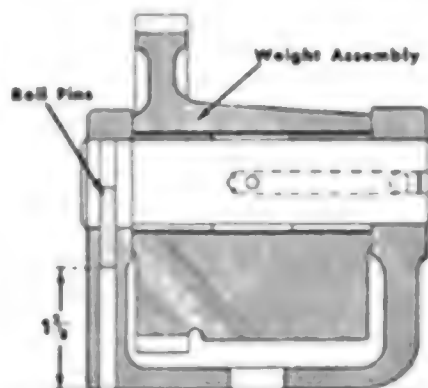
Sectional view of balancer weight gear, housing and shaft showing correct installation of roll pins. Roll pins must be shorter than shaft diameter.
